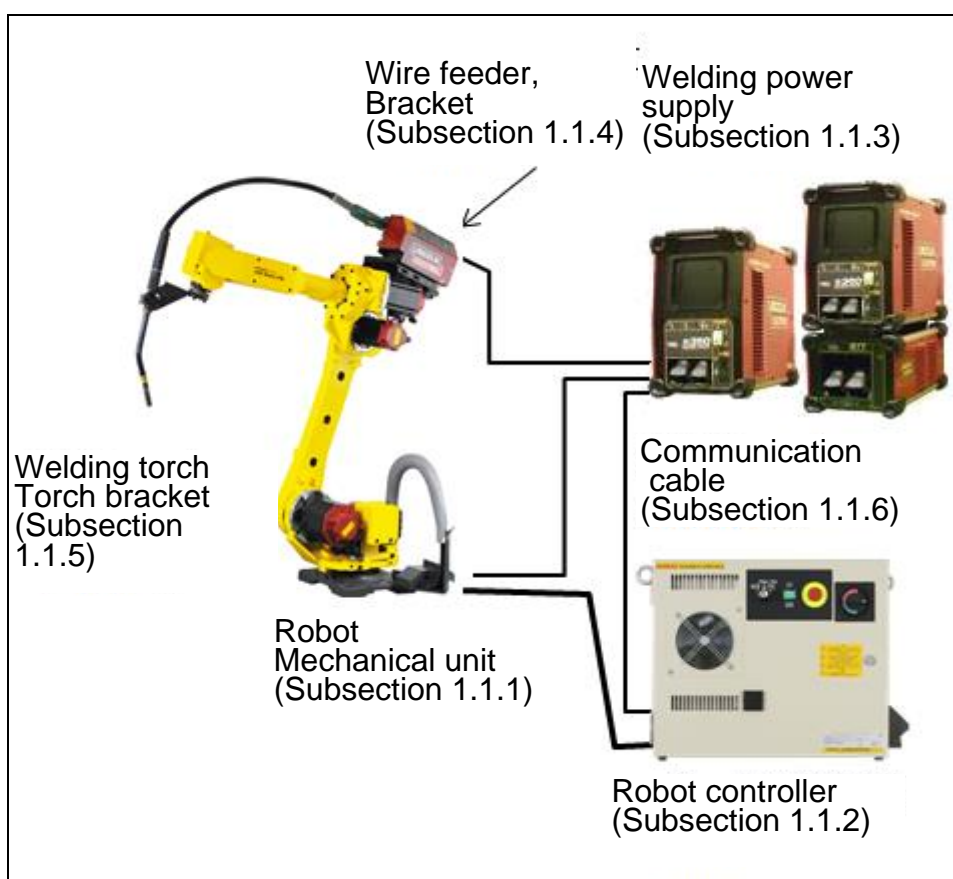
(a) Configuration of robot with welding power supply option
